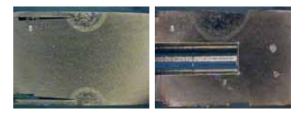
Photograph of cross section of weldments (left: between cladding and plug, right: pinhole)
